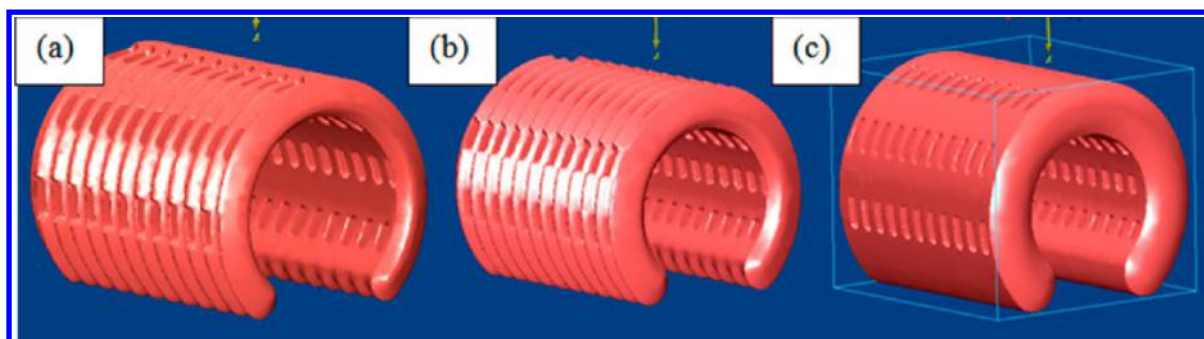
STL design for (a) 3 mm wall thickness splint (b) 4 mm wall thickness splint, and (c) 5 mm wall thickness splint.
